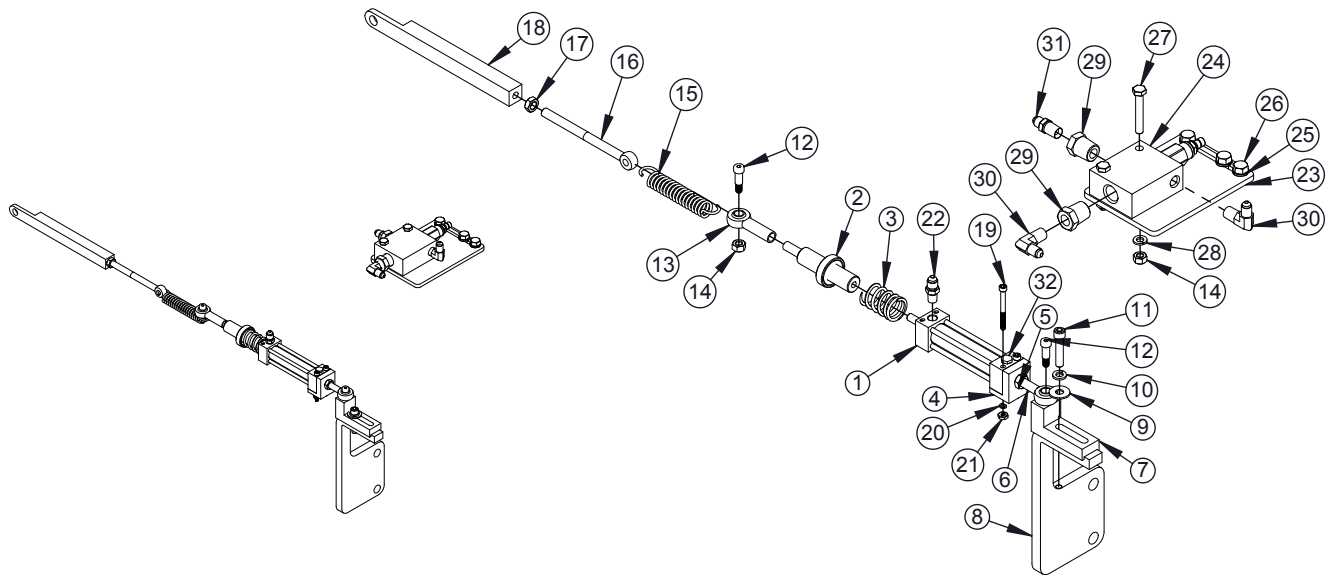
DPU440-11 Diesel Power Unit Assembly
